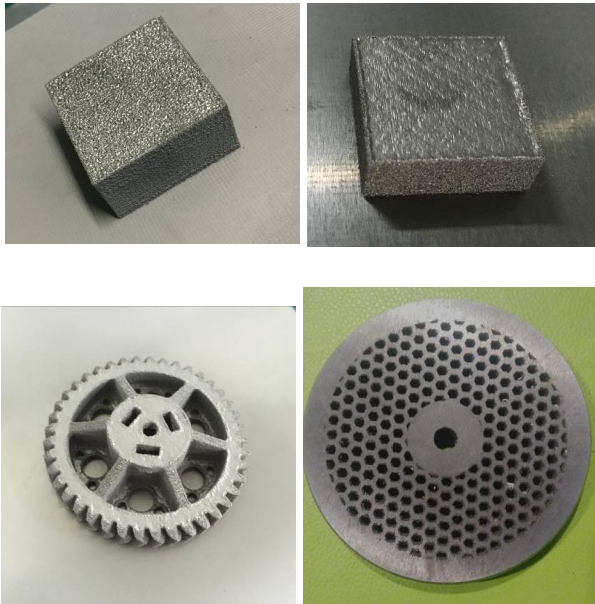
WC/Co hard alloy samples and parts fabricated by EBSM.
